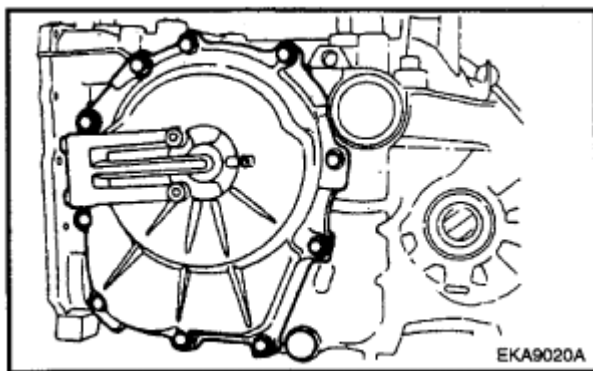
Identifying Transfer Drive Gear Case And Locking Nut
